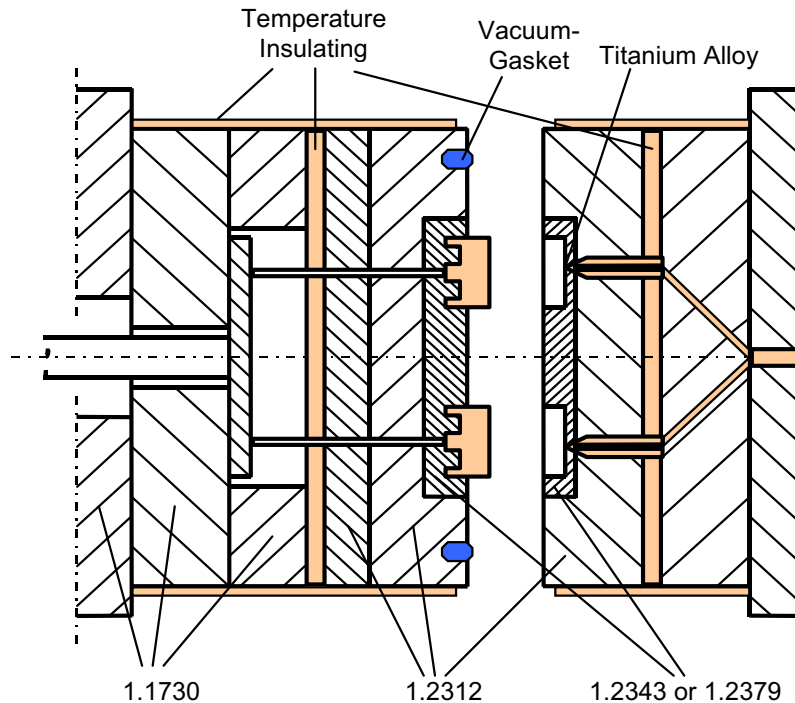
Sketch of a coldrunner mould for silicone rubber
